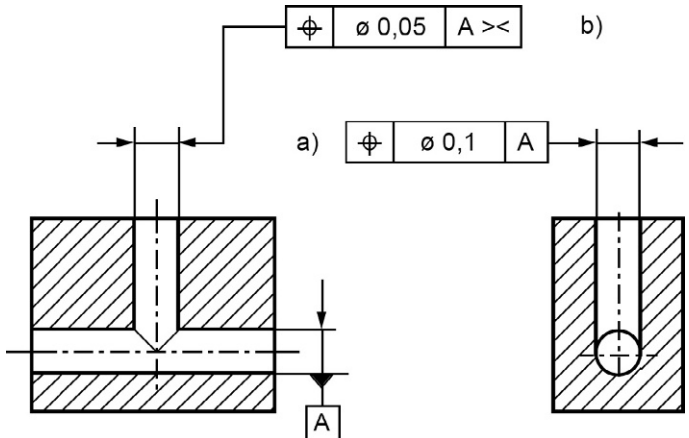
Tolerancing of axes of holes, a) location tolerance, b) additional orientation tolerance
